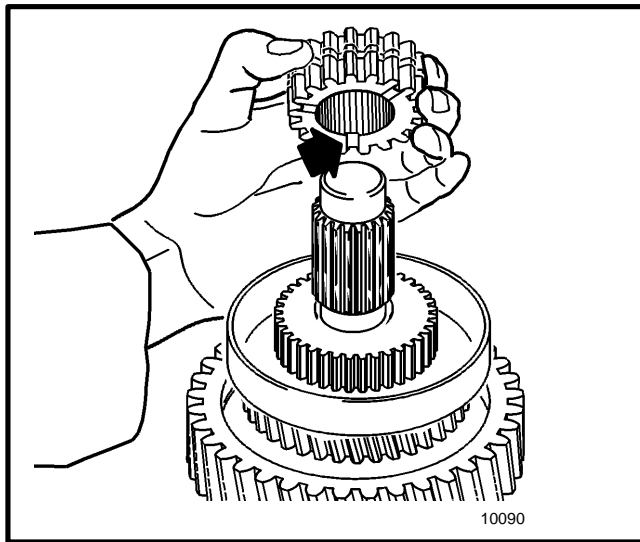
INSTALL THE HUB WITH THE OIL GROOVE TOWARD THIRD GEAR
